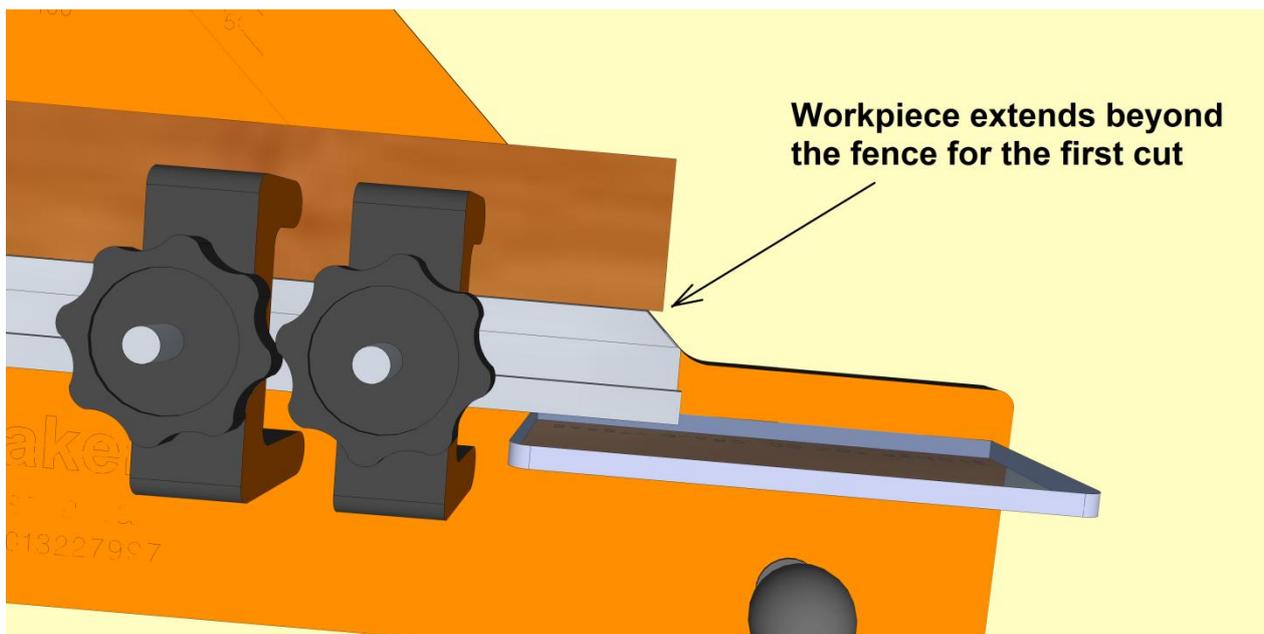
Ensure the workpiece slightly extends beyond the edge of the fence
